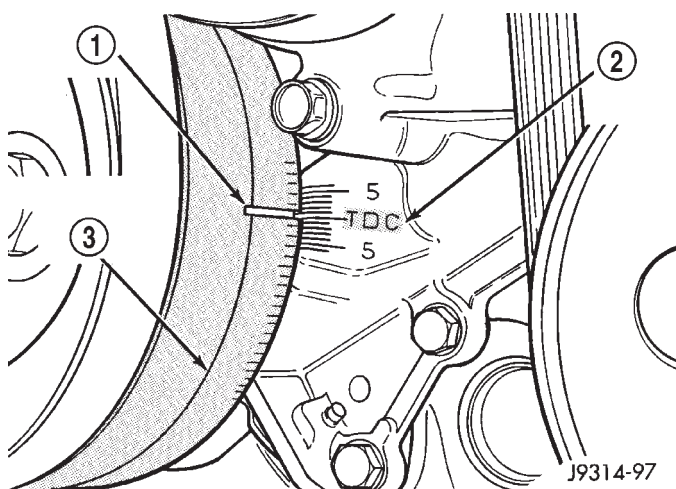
Damper-To-Cover Alignment Marks—Typical
